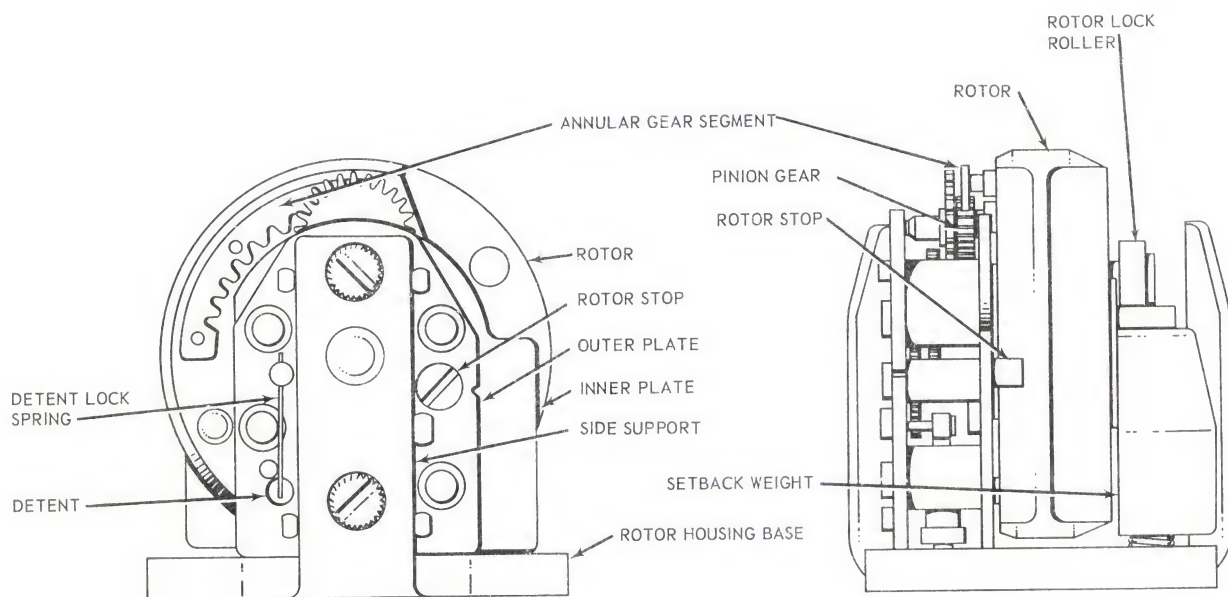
Rotor Arming Mechanism Removed From Fuze.
